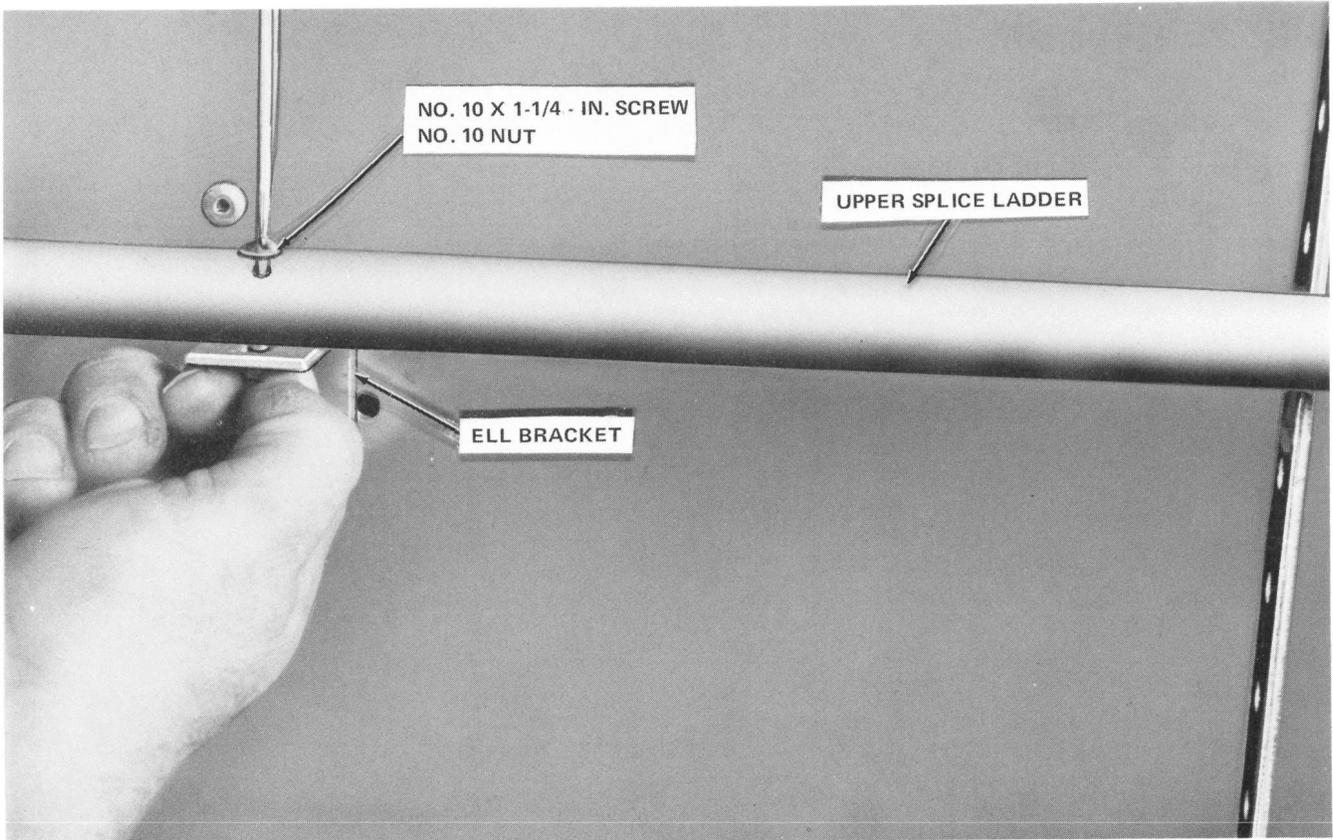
Attaching Upper Splice Ladder to Ell Bracket
